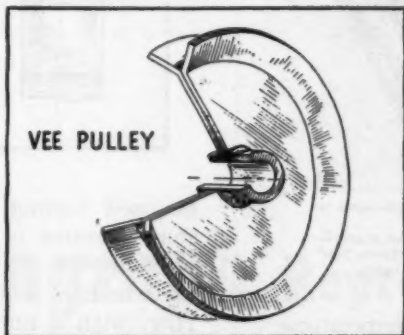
Pulley is fabricated from two steel discs formed to produce a vee-shaped rim.
